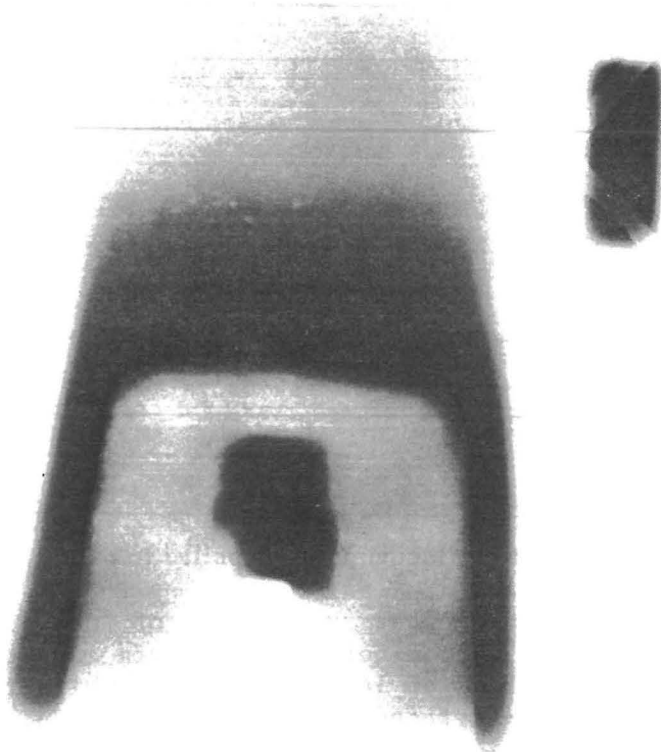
Radiograph of bucket-wheel excavator tooth showing small voids at casting-surfacing interface.
